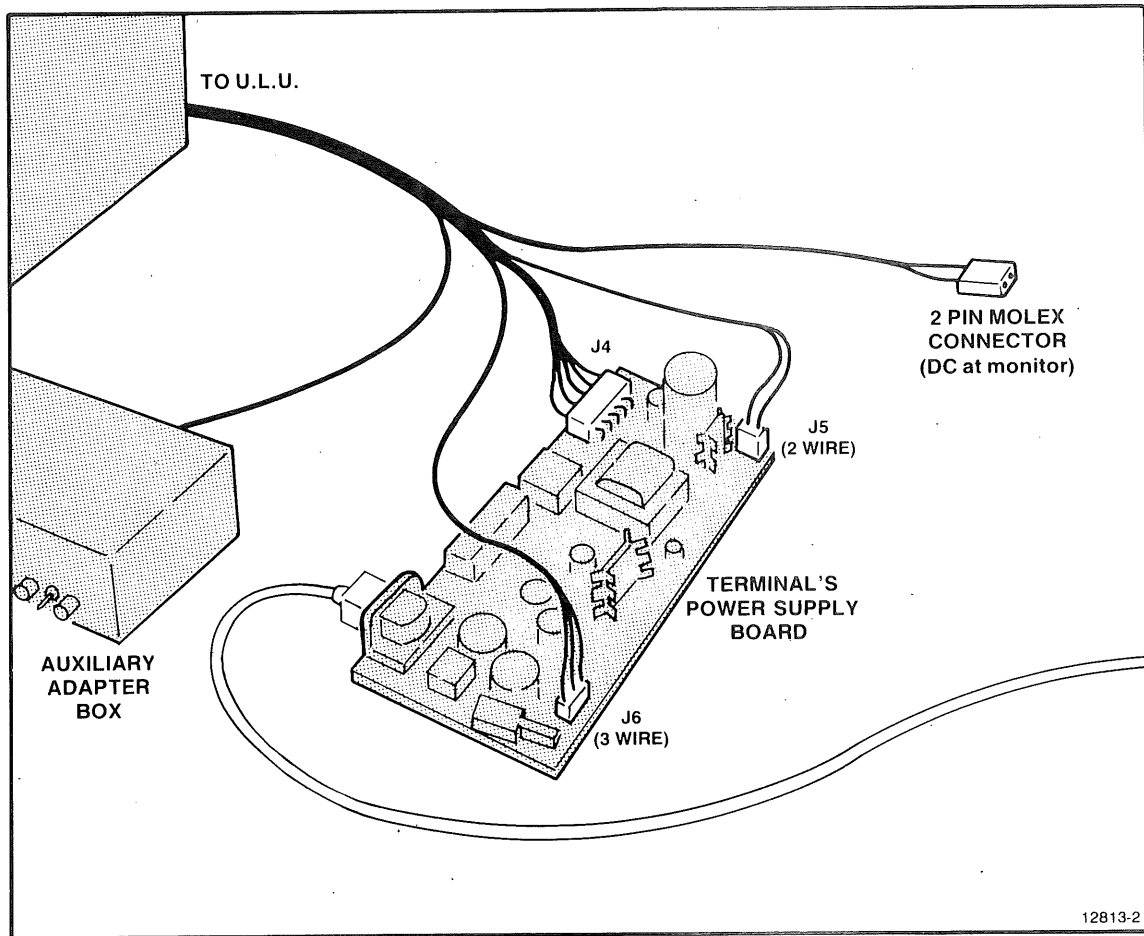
Connecting the Terminal to the Universal Load Unit and Auxiliary Box.
